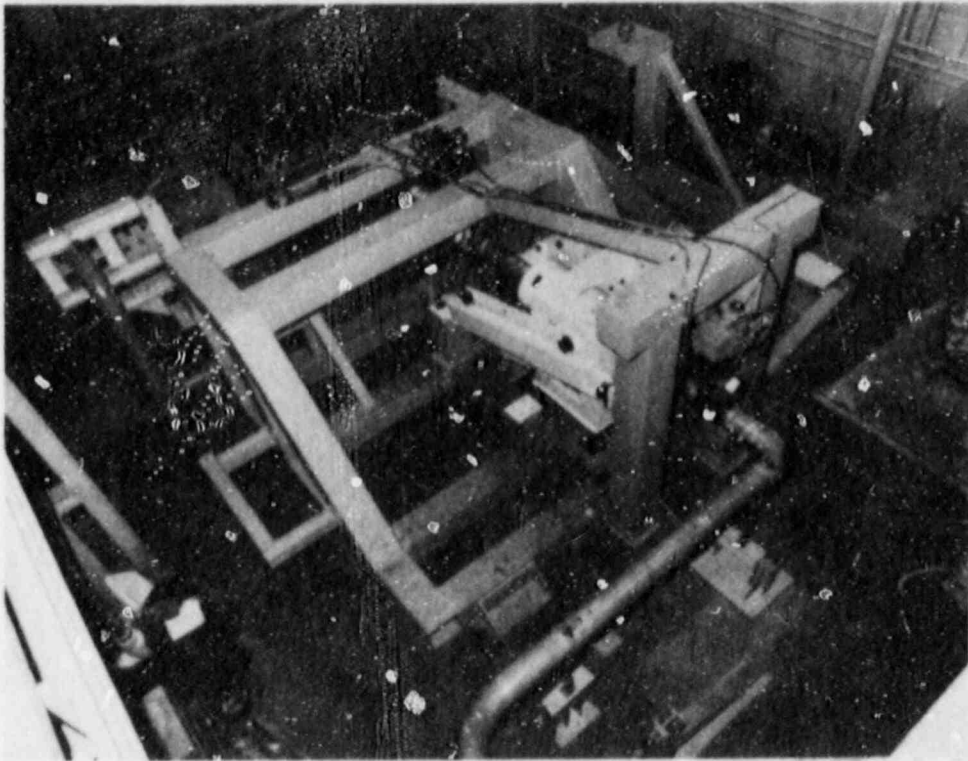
Overhead view of test fixture, penetration, and most piping of the 8-in. gate valve assembly.
